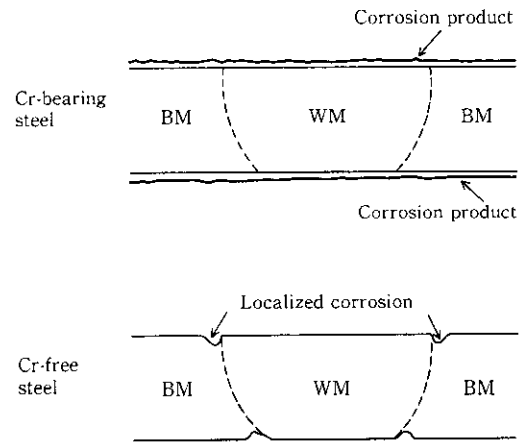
Schematic illustration for the surface of welded joint
